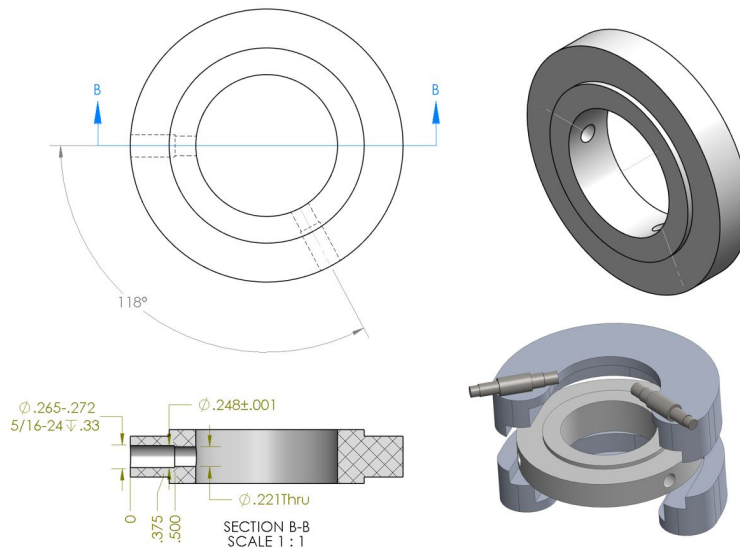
Shown Is a Sketch and Model of a Joint with Two Pressure Transducer Ports Created by the Technicians in the Machine Shop at Arizona State University. Note the Image in the Bottom Right Is Displayed as an Exploded View to Show How the Pieces Fit Together. The Pieces of the Triple Pressure Transducer Shown in Figure 19 Fit Together Identically. *Used with Permission from Brian Ipema and the Instrument Design and Fabrication Shop at Arizona State University.
